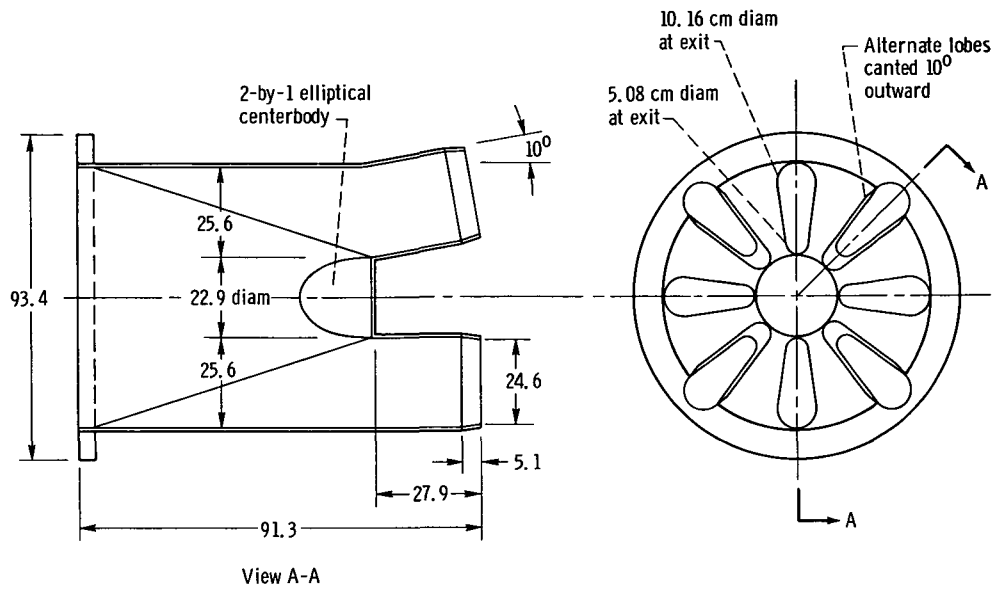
Configuration and dimensions of mixer nozzle. (All dimensions in centimeters.)
